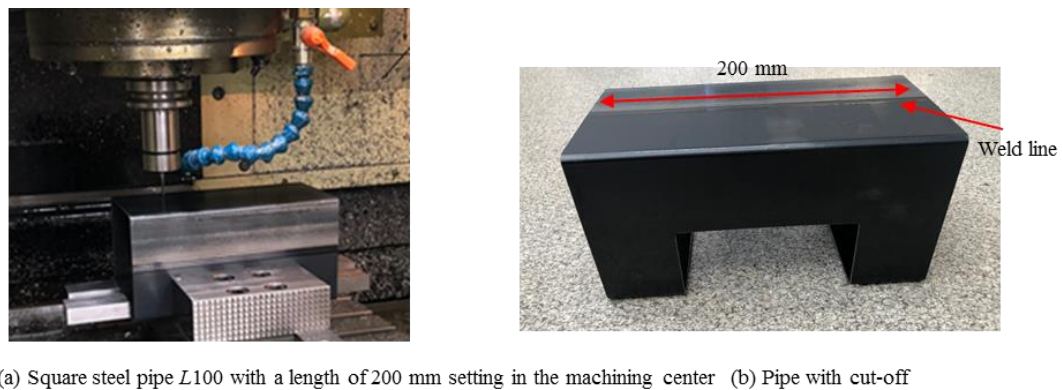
Experimental member fabrication for 200 mm long square steel pipe L100 with cut-off and press folding lines. MC processing machine to perform cut-off and slit processing. For the press folding line process, two 3 mm thick jig plates inserted into two slits transmitting a load of 25 kN to the pipe.
